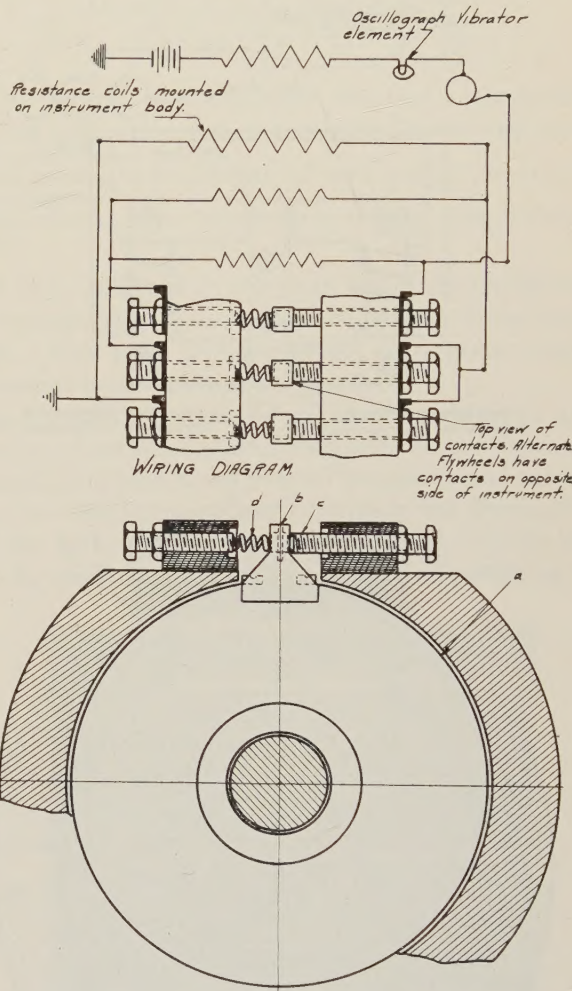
CROSS-SECTION SHOWING DISK FLYWHEEL AND CONTACT
